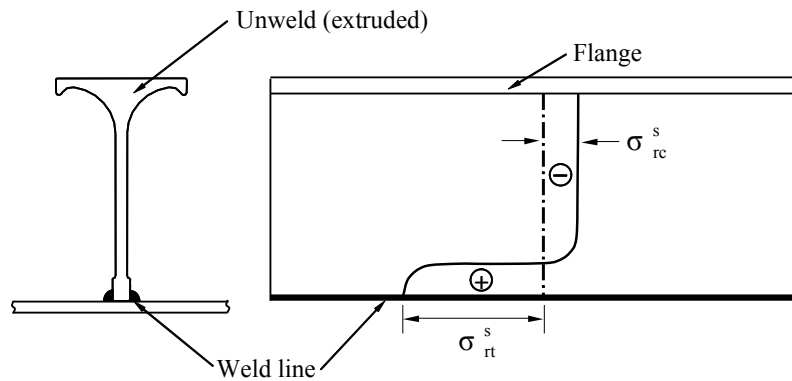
(b) Schematic of fillet weld-induced residual stresses in the stiffener web
